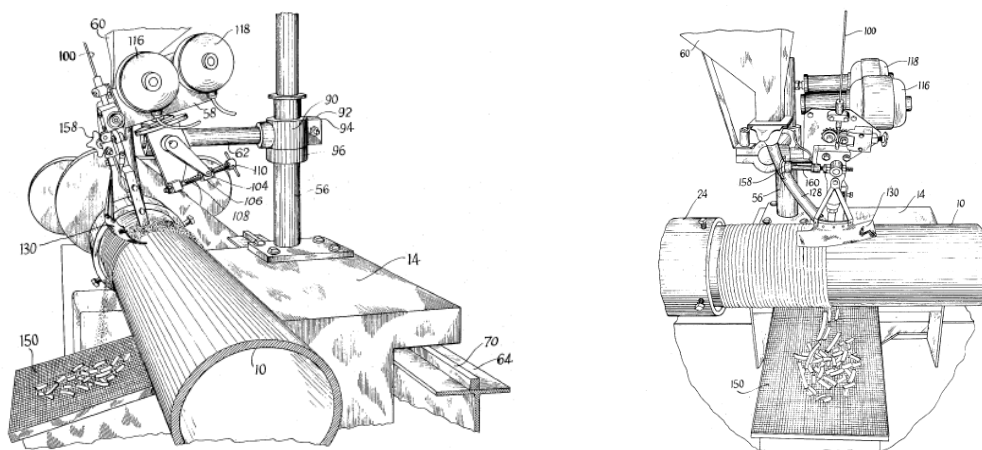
Perspective view of a wire and arc welding machine for the manufacture and cladding of retorts (Carpenter and Kerr, 1947).
